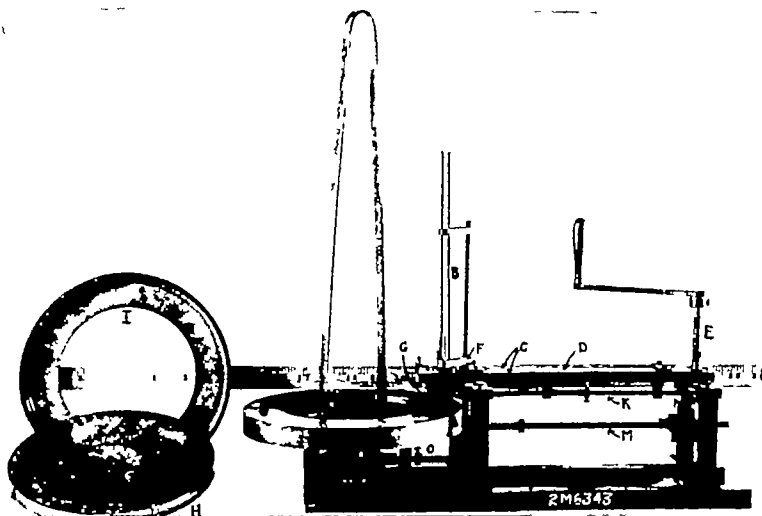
Machine used for semi automatic cutting of gold implants. *A*, steel base, *B* glass tube through which gold feeds into the cutter, *C* fixed bars which hold the stationary blade, *D* bar which holds the movable blade, *E* crank shaft with cams, *F* coil spring to release gold tube from the stationary blade, *G* funnel to guide implants to the container below, *H*, implant container, *I* lead protection screen, *J*, lead screen and implant container with long handle attached, *K* shaft to operate the wire brush and bronze spring stop below the blades, *L* part of the steel frame of the cutter, *M*, shaft to rotate the implant container, *O* break arrangement to regulate the rotation of the container through small angles
